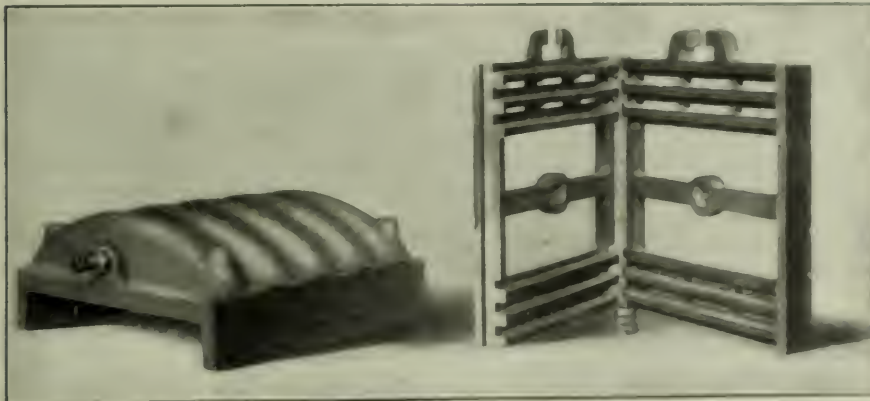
PRESSURE PLATE AND HALVES OF VALVE
